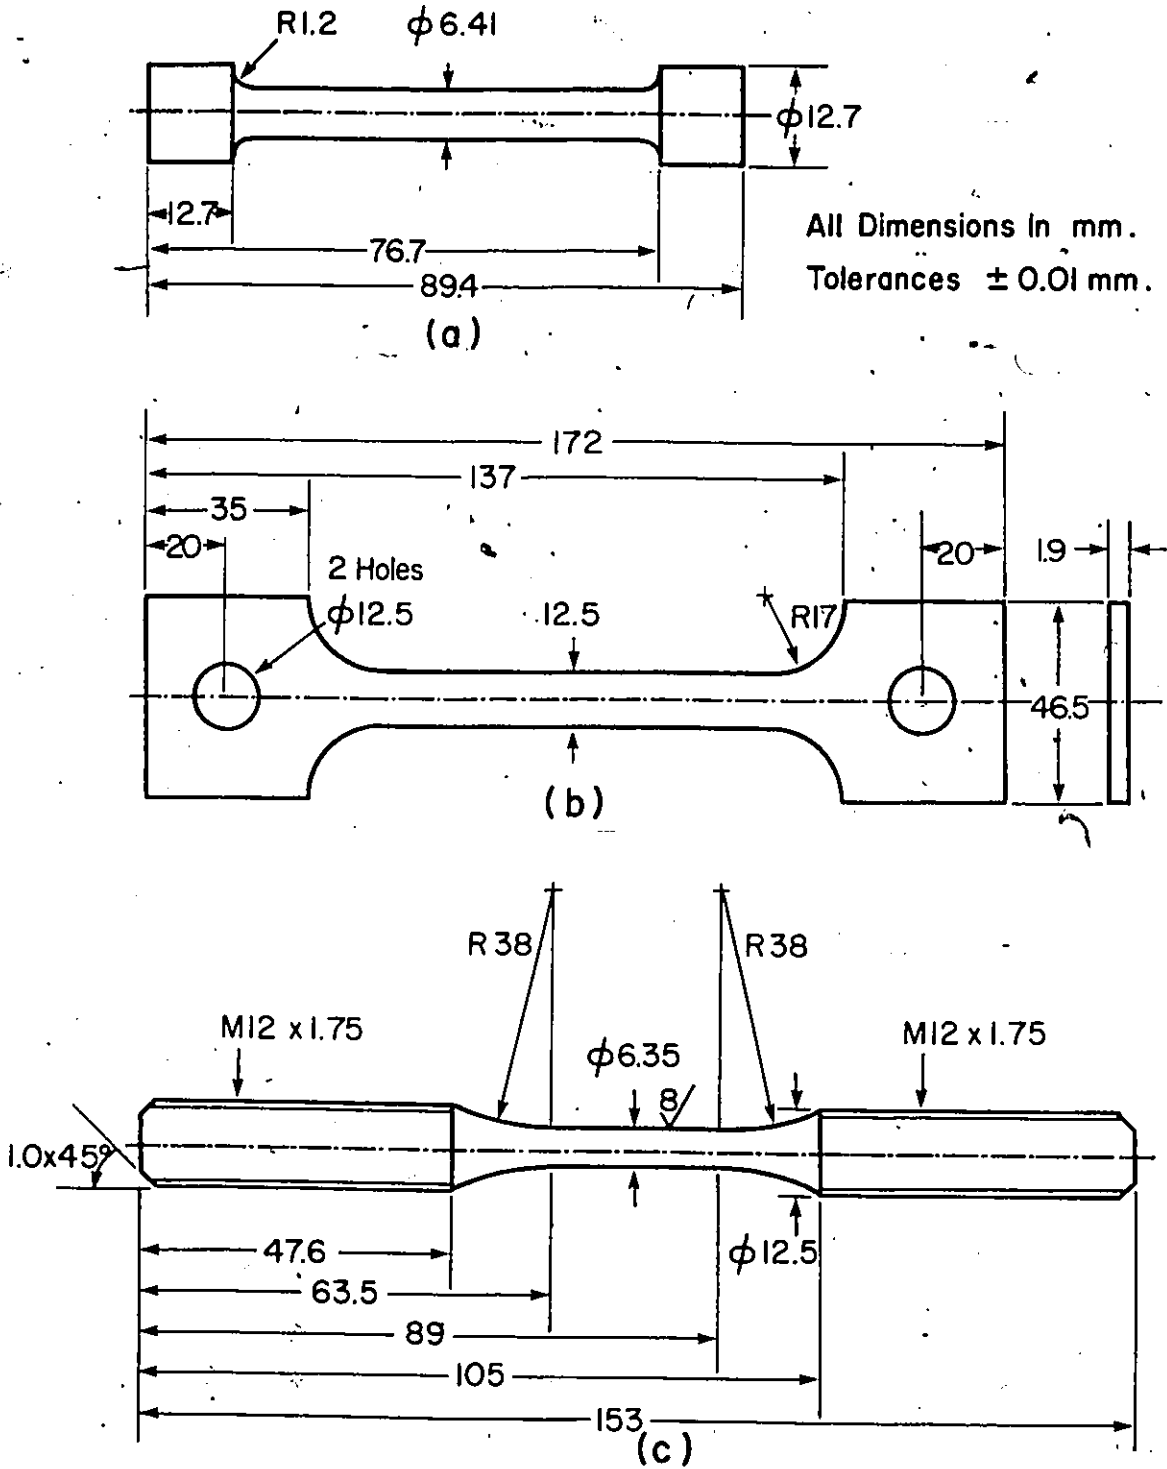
Tensile and fatigue specimens. (a) Round, shouldered-end tensile specimen, (b) Sheet type tensile specimen and (c) Tension-Compression fatigue specimen.
